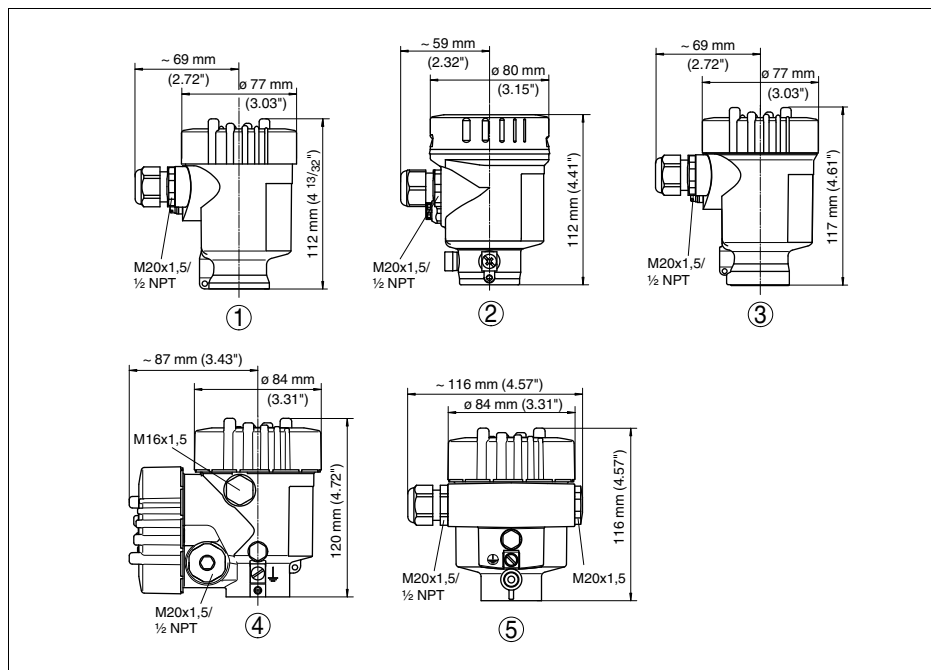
Housing versions (with integrated PLICSCOM the housing is 9 mm/0.35 in higher)
